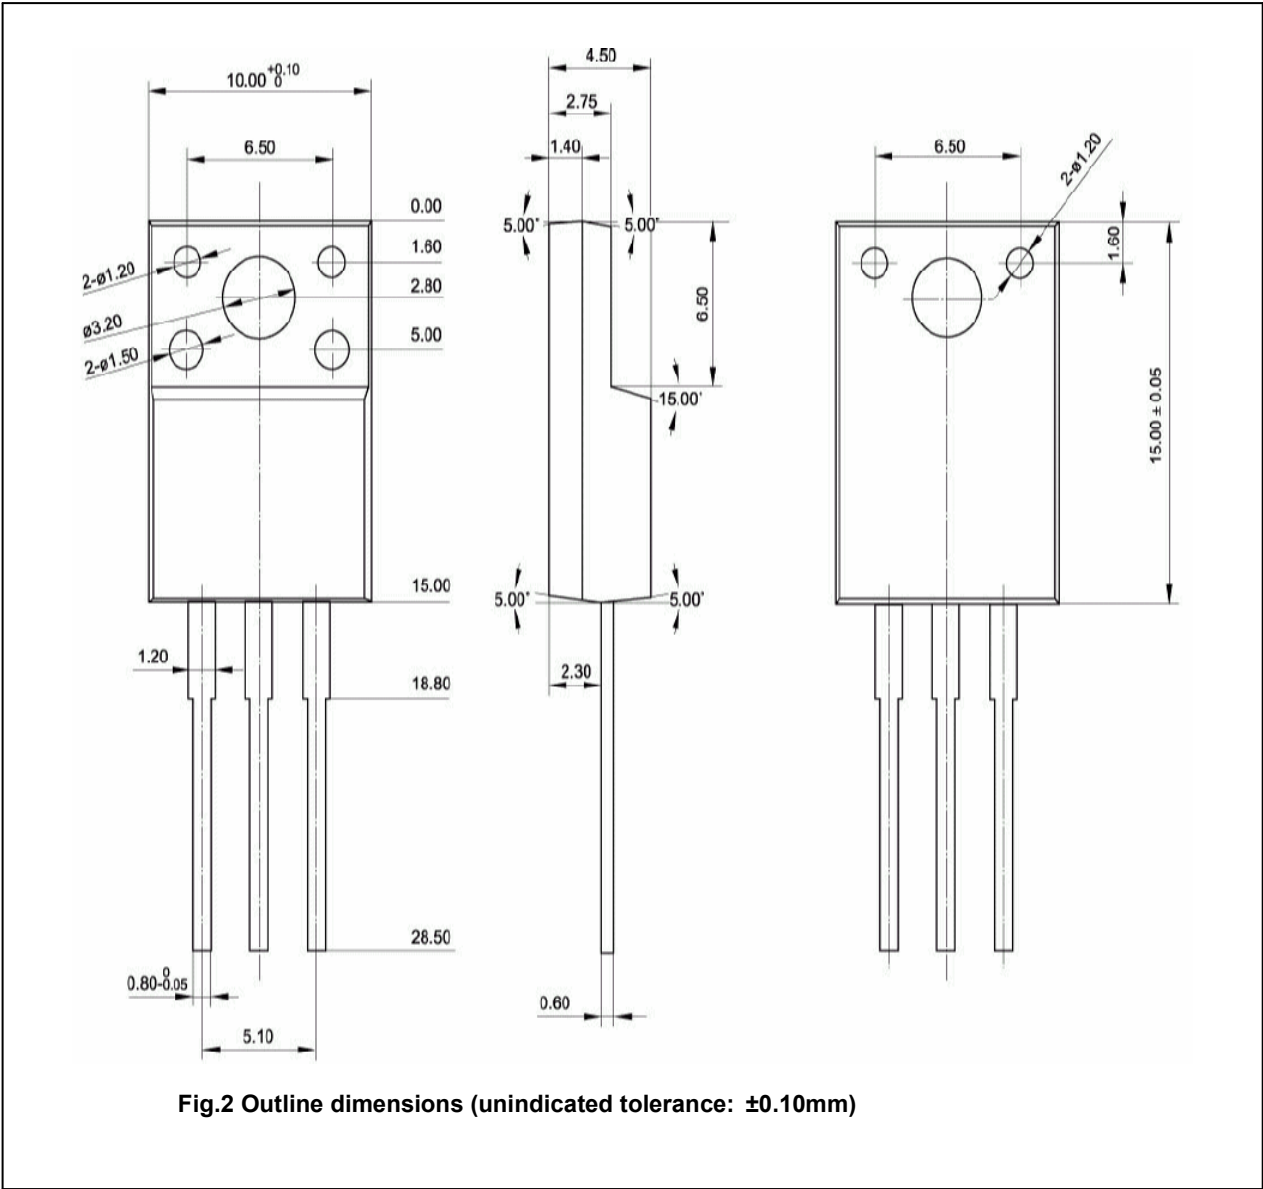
Outline dimensions (unindicated tolerance: $\pm 0.10\text{mm}$)
